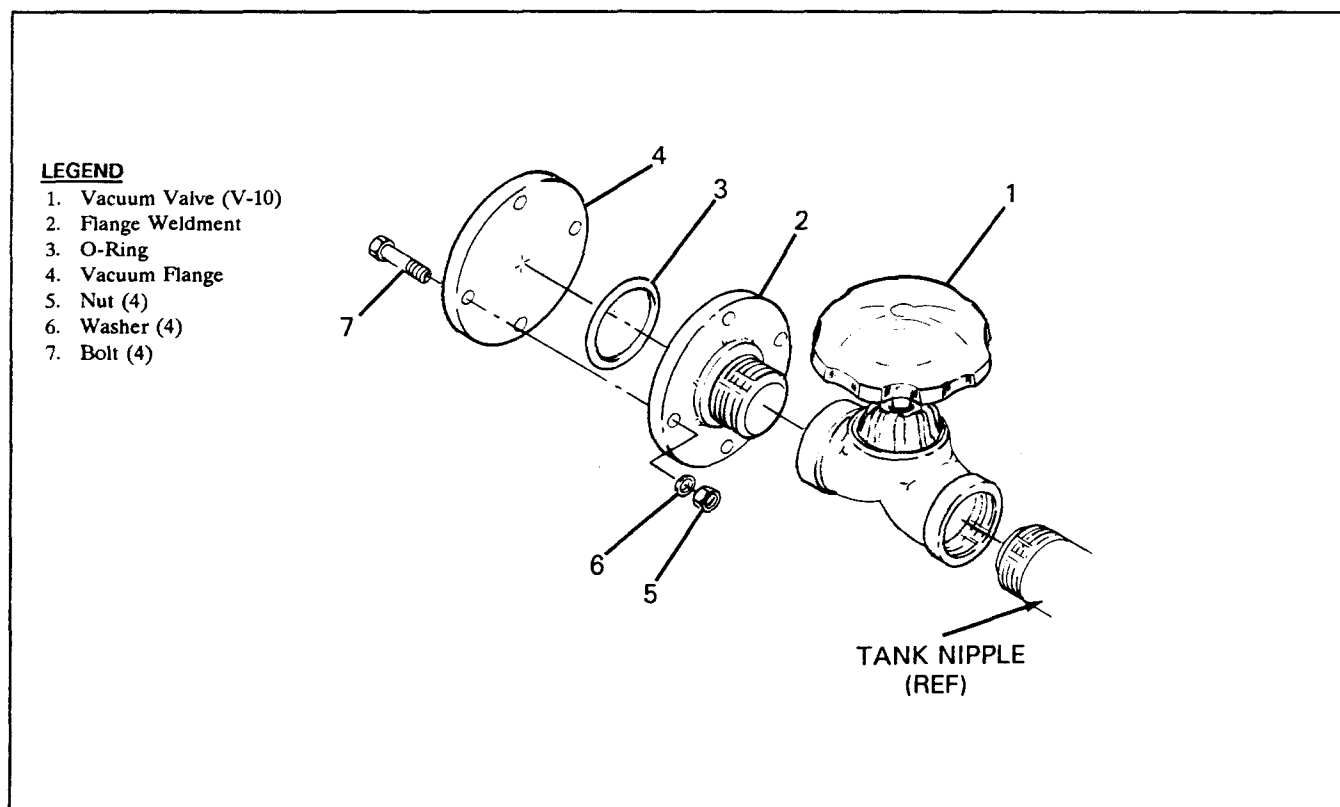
Vacuum Line Shut-off Valve Assembly
